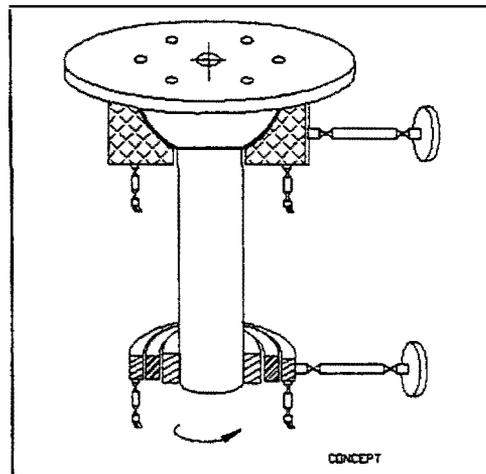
Basic design of the machine. The test object weight is supported on an upper spherical gas bearing. A lower gimbal mounted cylindrical gas bearing resists the overturning moment due to unbalance.
